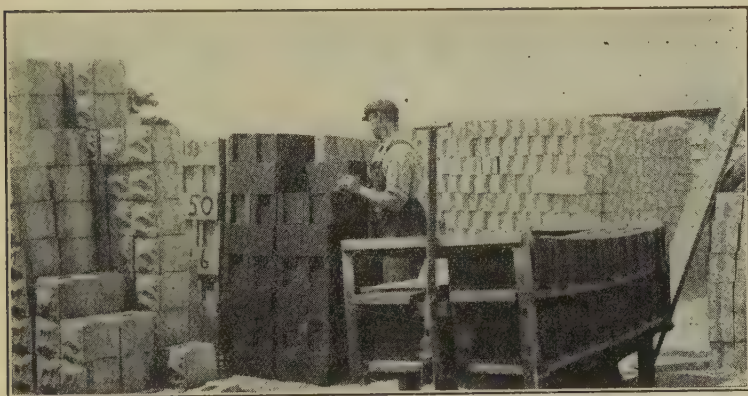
PILING TEST BLOCK IN THE STORAGE YARD IMMEDIATELY AFTER STEAM TREATMENT.
